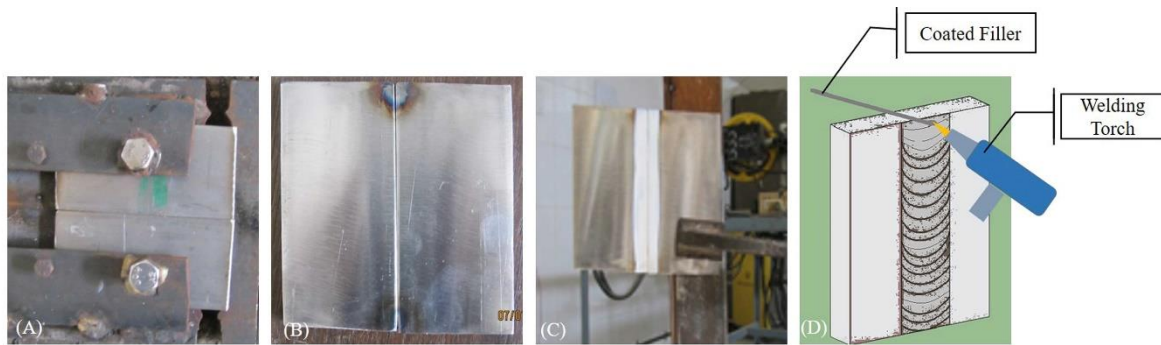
Vertical A-TIG welding process steps from left to right (Before tacking in a fixture, After tacking and buffing, Holding of test coupon after applying activated flux and last represent the process)
